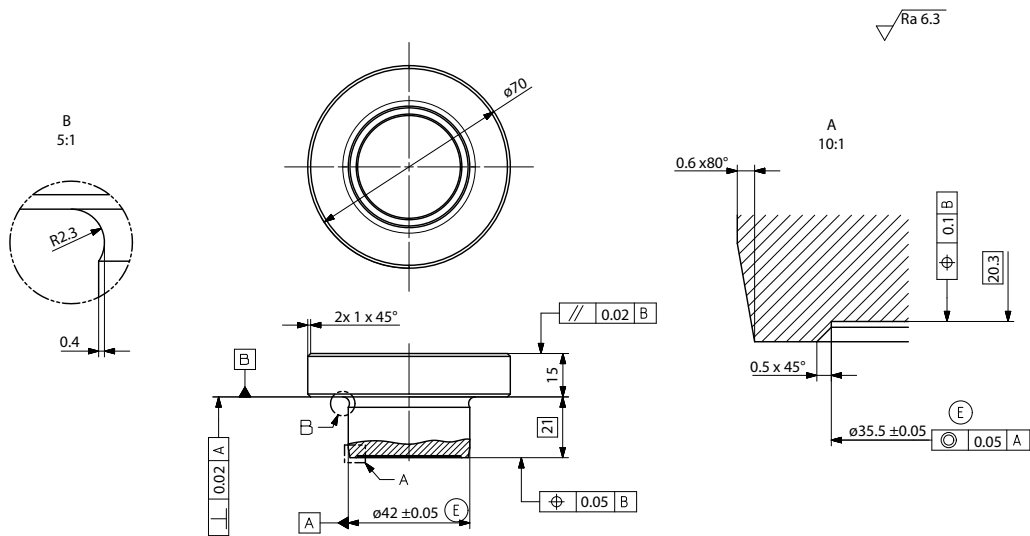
Pressing tool for needle bearing (1 of 4) - Rear needle bearing
